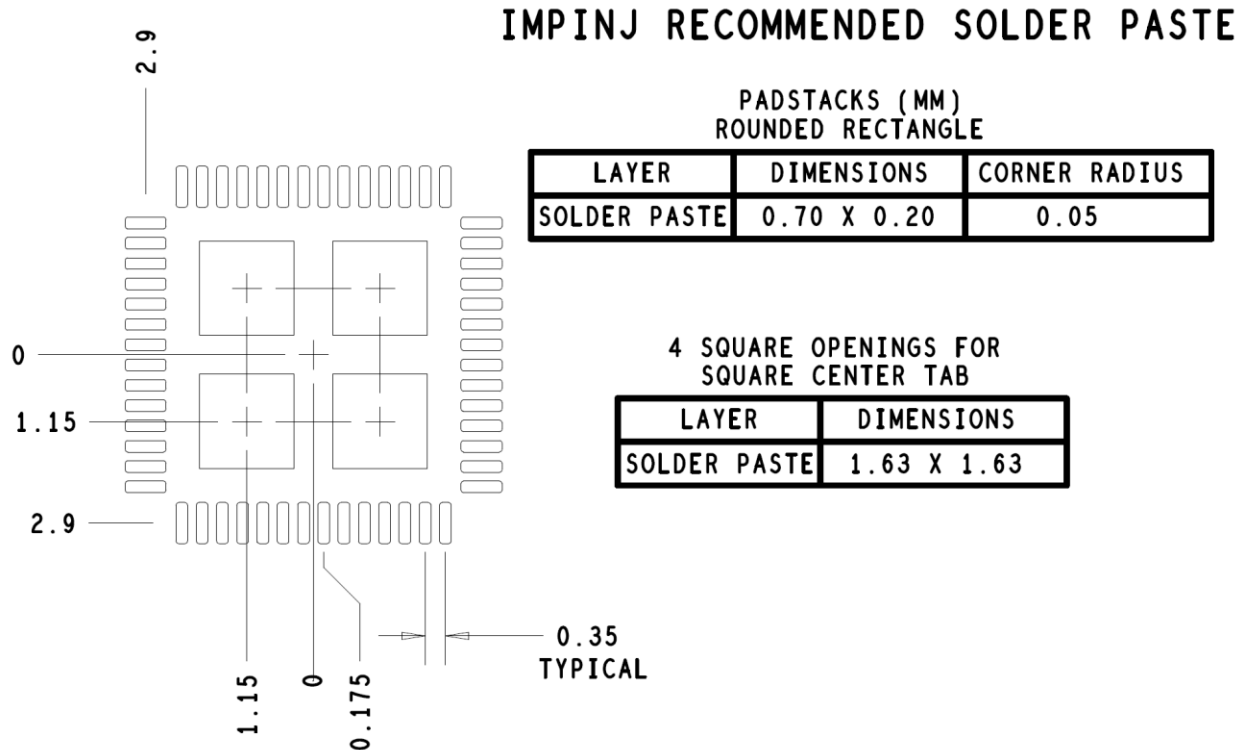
Recommended PCB Footprint Solder Paste Dimensions
